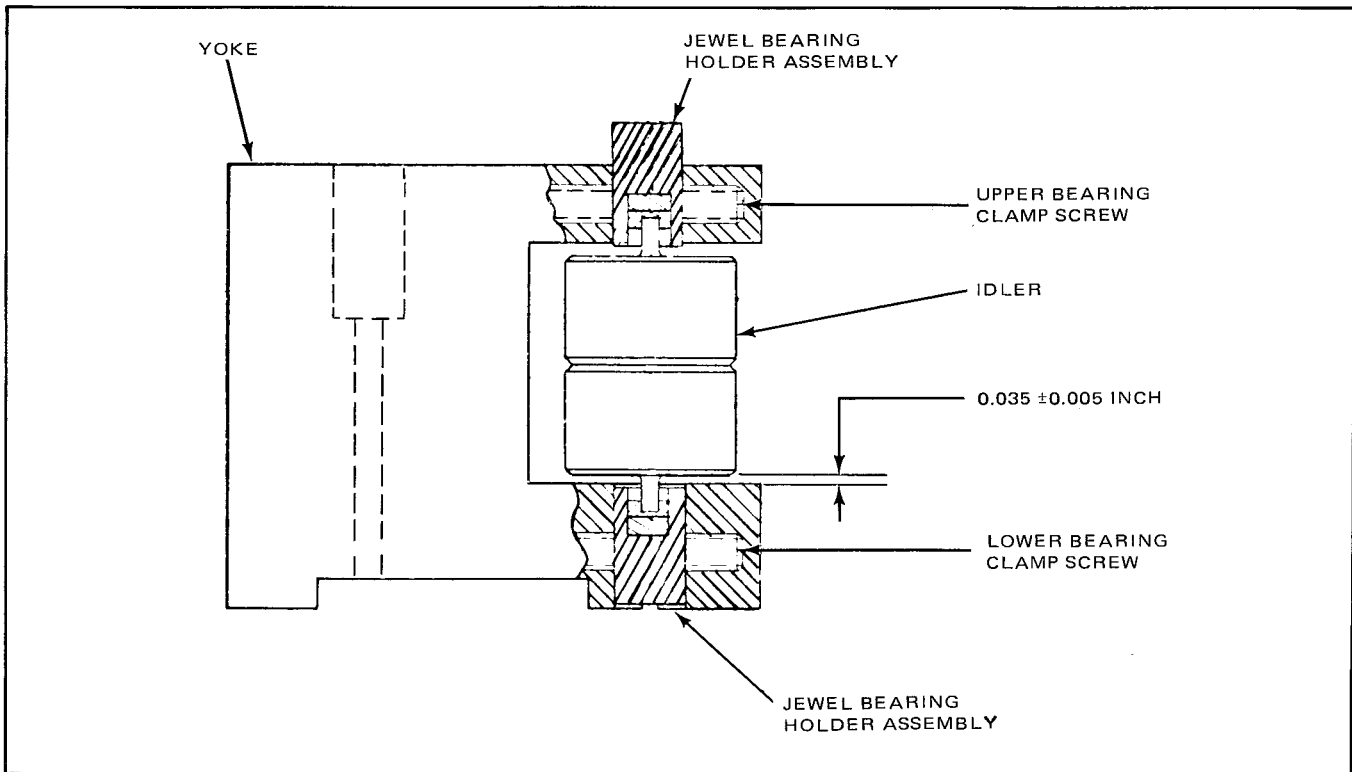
Scrape Flutter Idler, Side Cross-Section View
